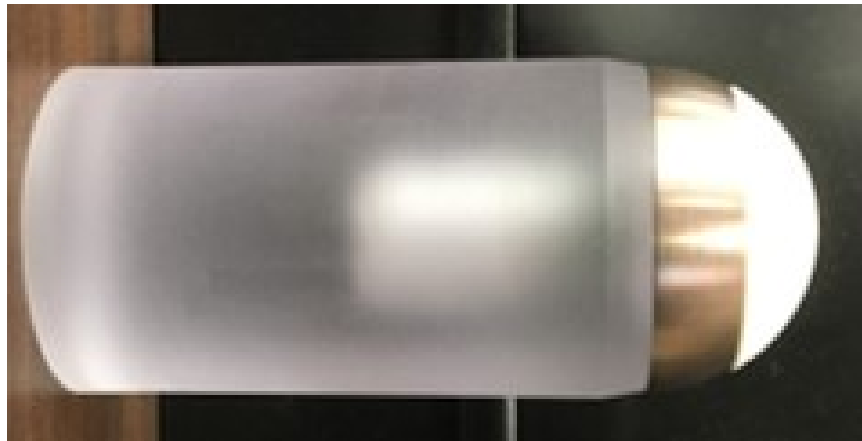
Photograph of Assembled Full Bore Rider Projectile
